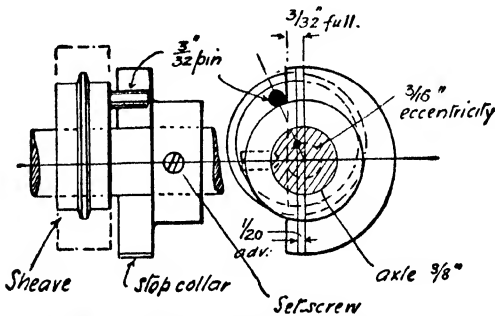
Diagram Showing Method of Setting-out Stop Collar and Slip-eccentric.
